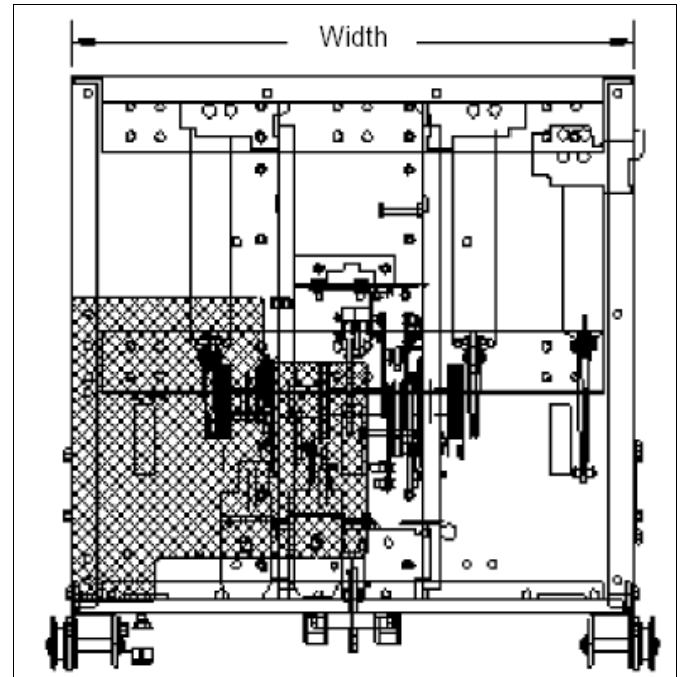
Typical Circuit Breaker Front View with CloSure™ Tool Attached (approximate mechanism chassis width)
